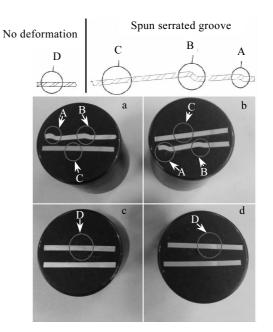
Inlayed specimens of serrated grooves on (a) and outside (b) the welded joint; undeformed parts inside (c) and outside (d) the welded joint zone
